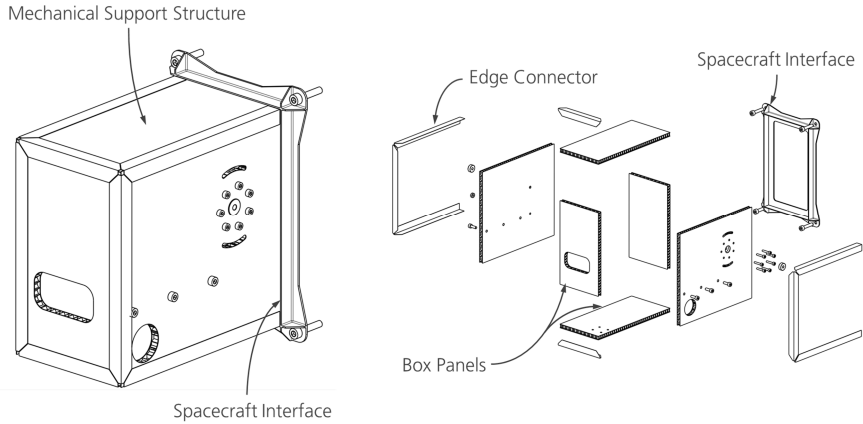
Support Structure with mechanical interface towards the host spacecraft in assembled state (left) and in exploded state detailing its subcomponents (right).
